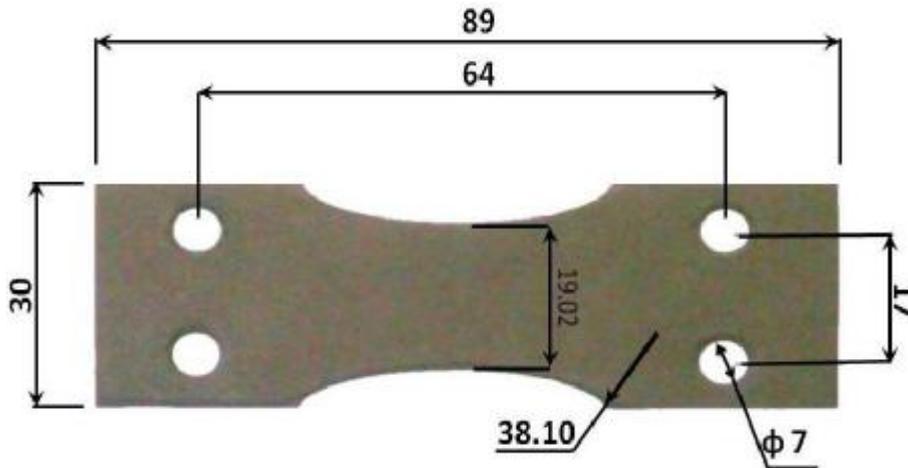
Fatigue Specimens (all Dimension in mm) [12].
